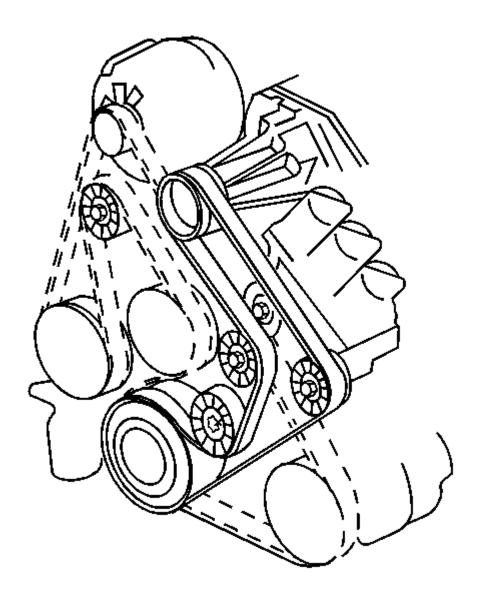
View Of Supercharger Drive Belt Courtesy of GENERAL MOTORS CORP.
